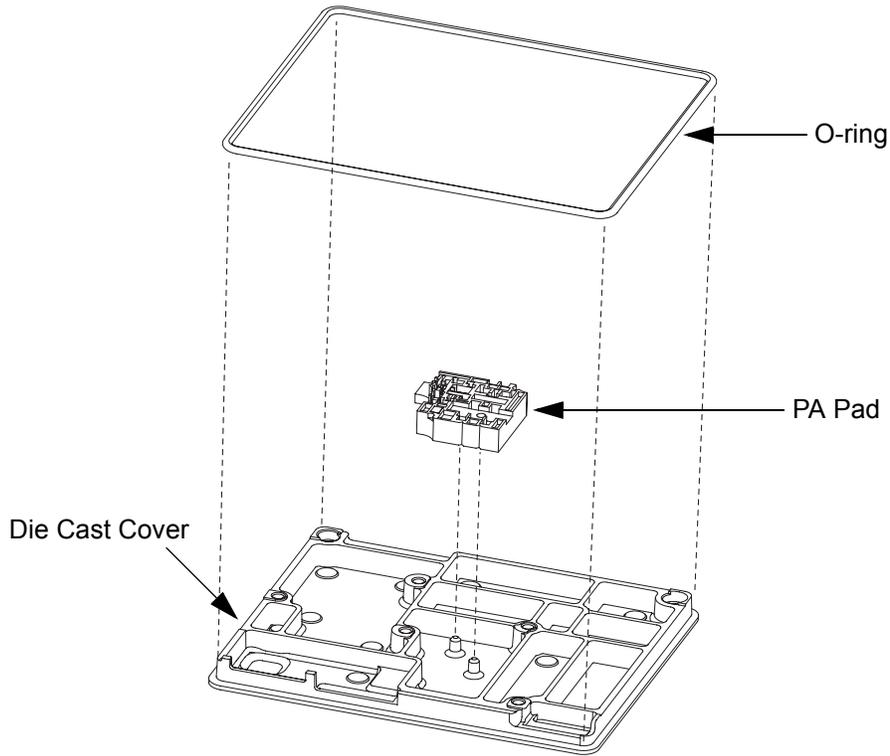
Assembling of PA Pad and O-ring (UHF models)
